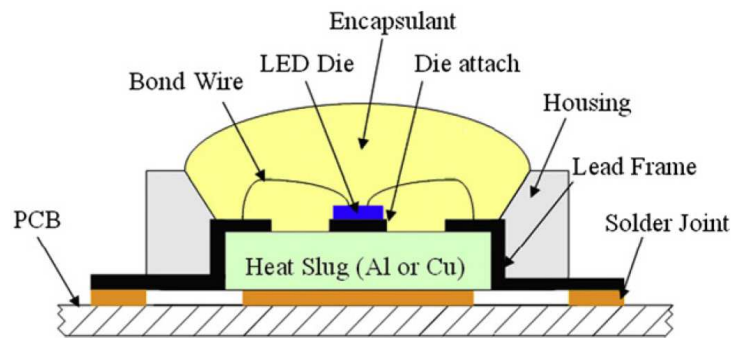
LED package assembled with printed circuit board (PCB). ©2011 Elsevier Ltd. Reprinted with permission.⁷⁷
